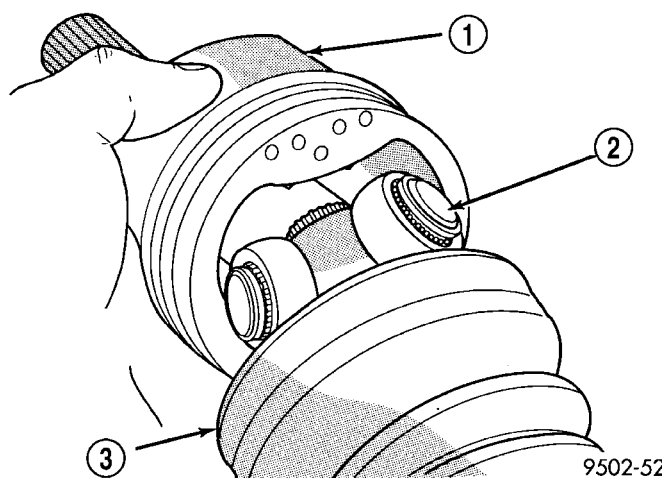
Installing Spider Assembly On Interconnecting Shaft
